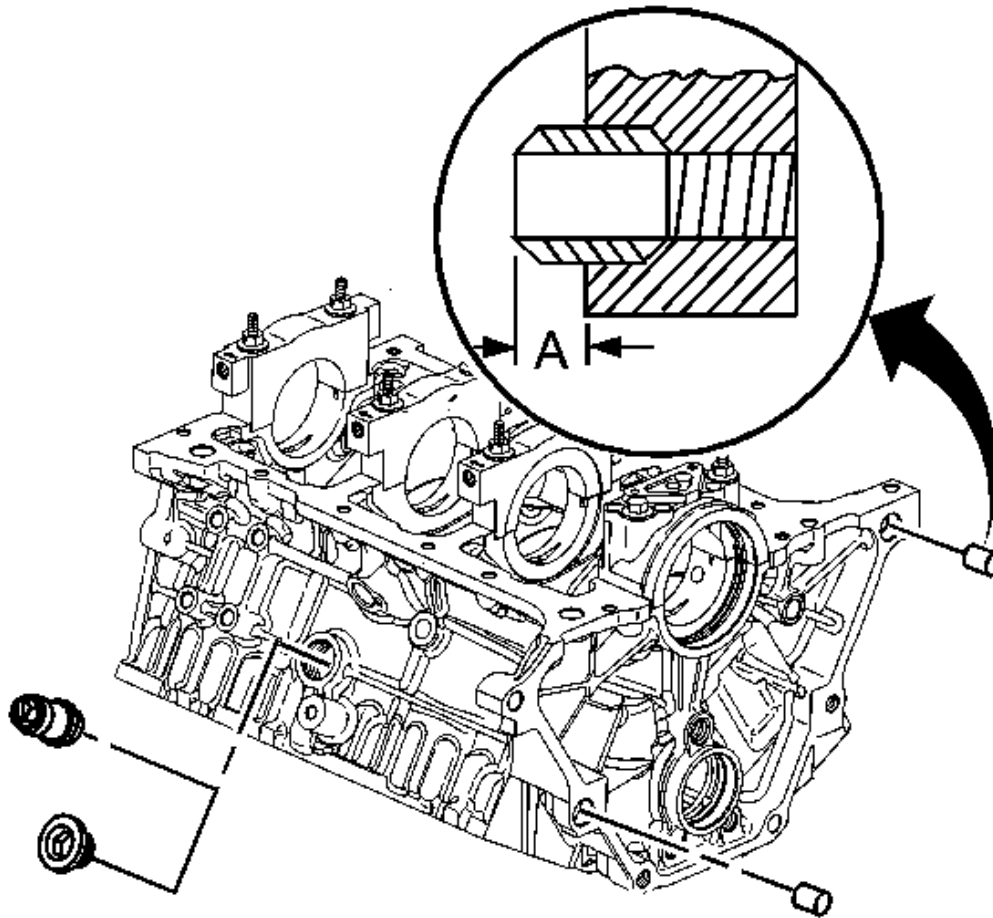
View Of Engine Block Plug, Engine Block Heater & Transmission Locating Pins
